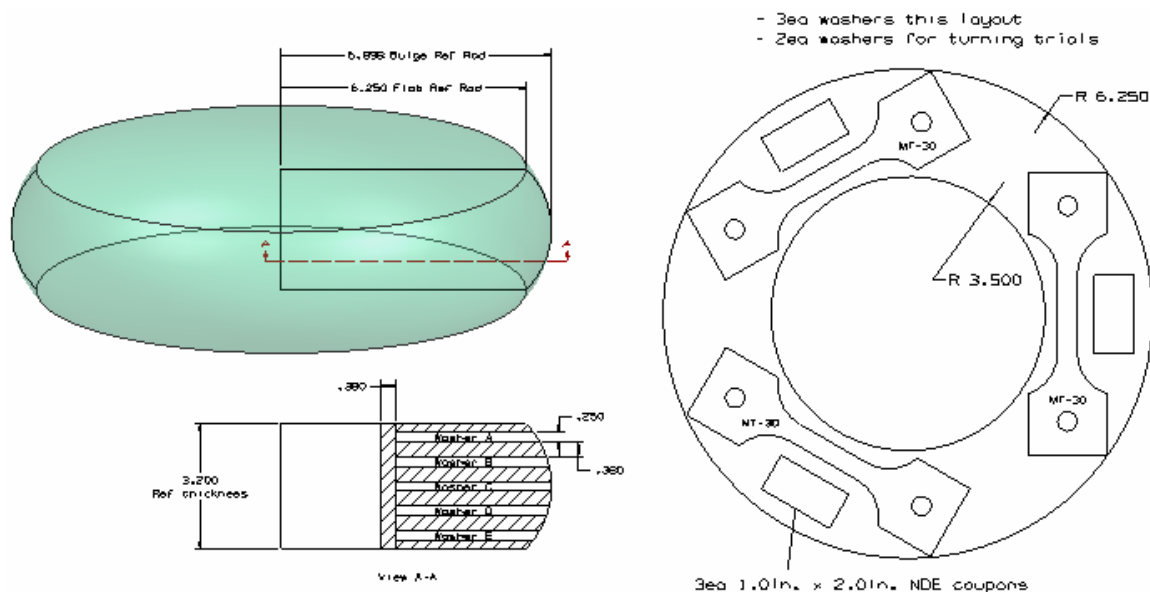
Sectioning of In718 Pancake to Produce Turn Test Samples.
